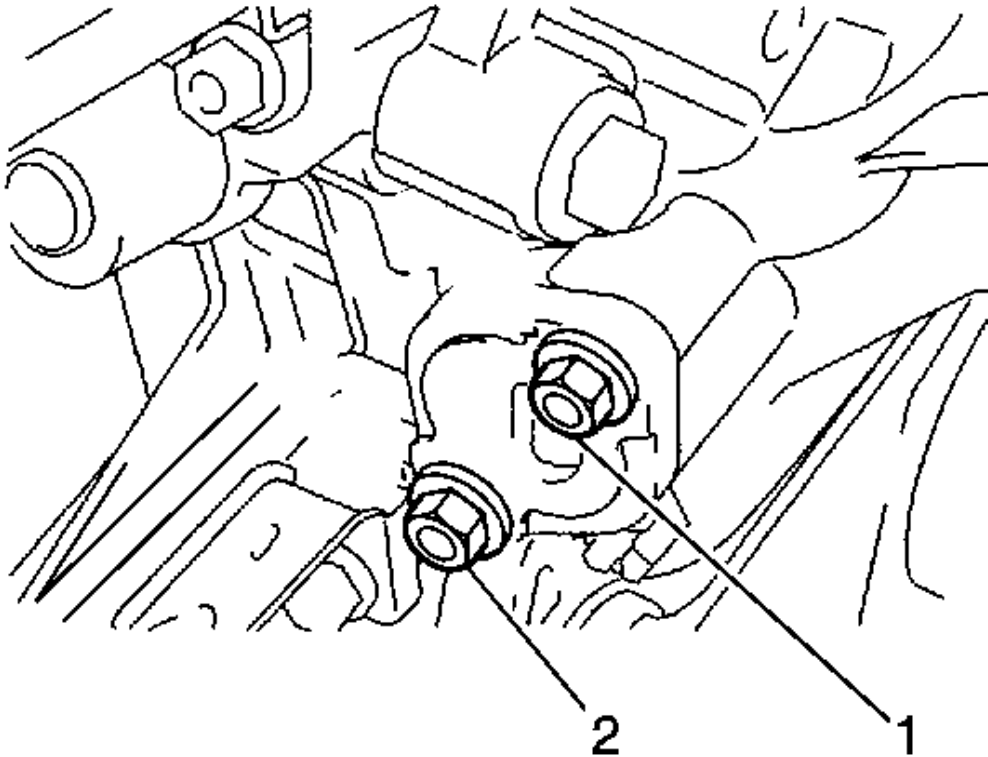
View Of 1 Chain Tensioner Assembly Removal
